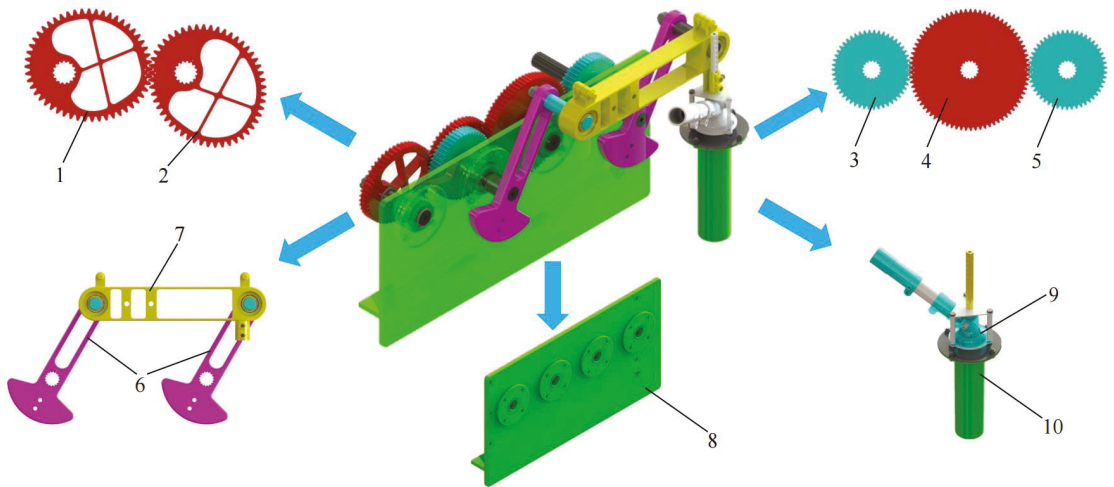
Structural diagram for the well-cellar cavitating mechanism: 1. non-circular gear 1; 2. non-circular gear 2; 3. spur gear 3; 4. spur gear 4; 5. spur gear 5; 6. crank; 7. linkage; 8. frame; 9. cavitating device; 10. cavitator.
